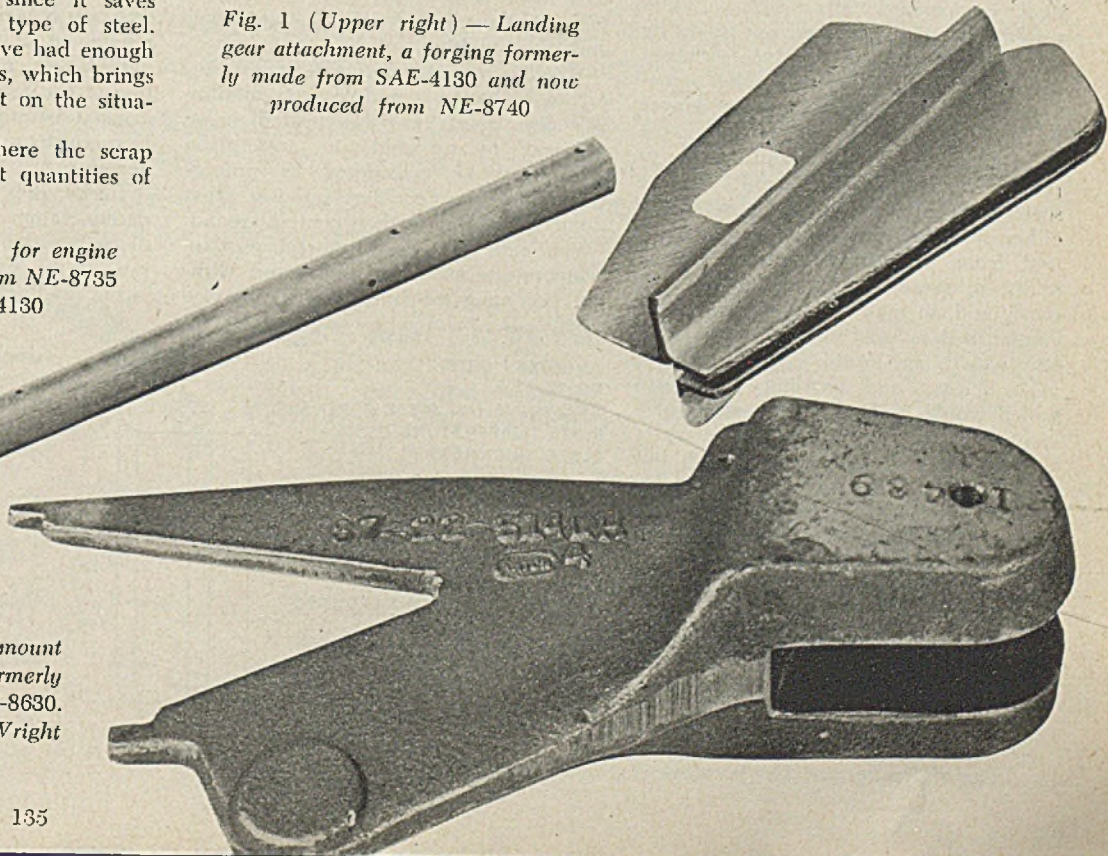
(Right) — Engine mount forgings for aircraft, formerly SAE-4130 and now NE-8630. All photos from Curtiss-Wright Corp.
